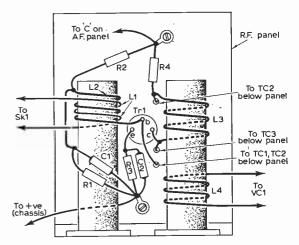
Wiring of the r.f. panel. Below—Coil winding data.
